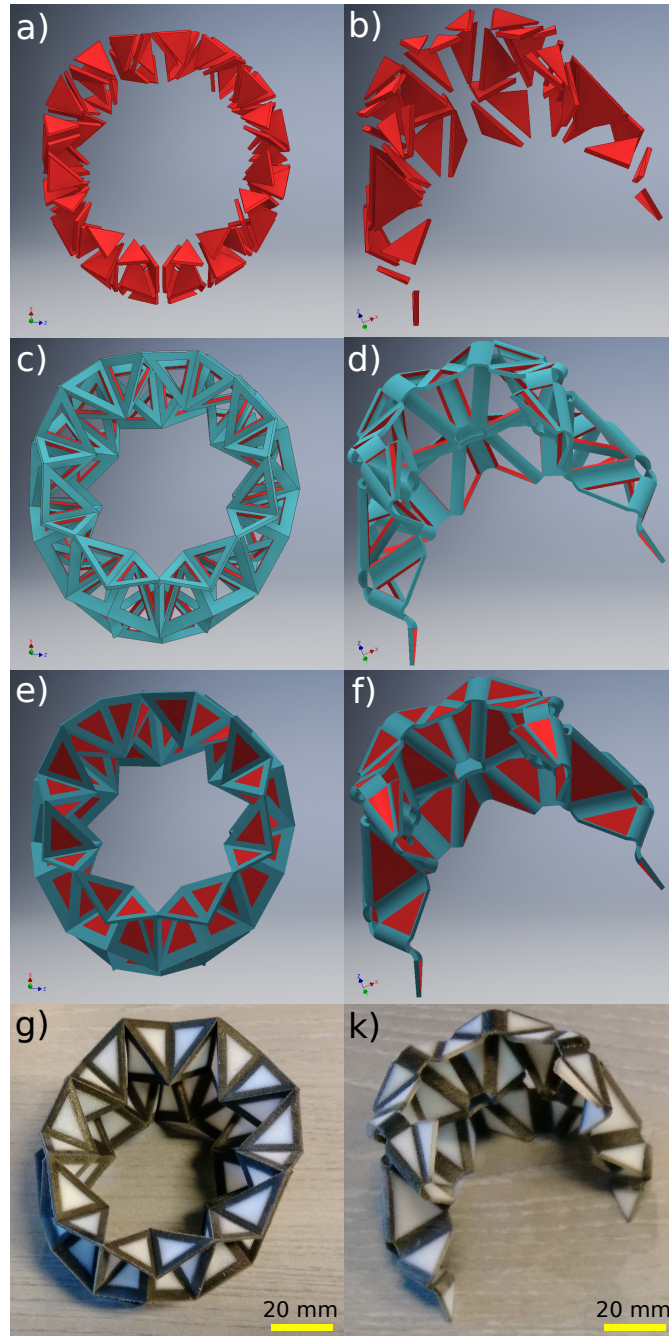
3D fabrication technique using multi-material 3D printing. The technique was tested on two parts of the magic wheel [Lee et al., 2013]. A cylindrical slide: (a) the facets and (c) edges were separated and thickened (using our separation and thickening codes), then (e) reassembled and (g) 3D printed. A quarter of the magic wheel: (b) the facets and (d) edges were separated, rounded (only the edges) and thickened (also using our separation, rounding and thickening codes) before being reassembled and (k) 3D printed.
